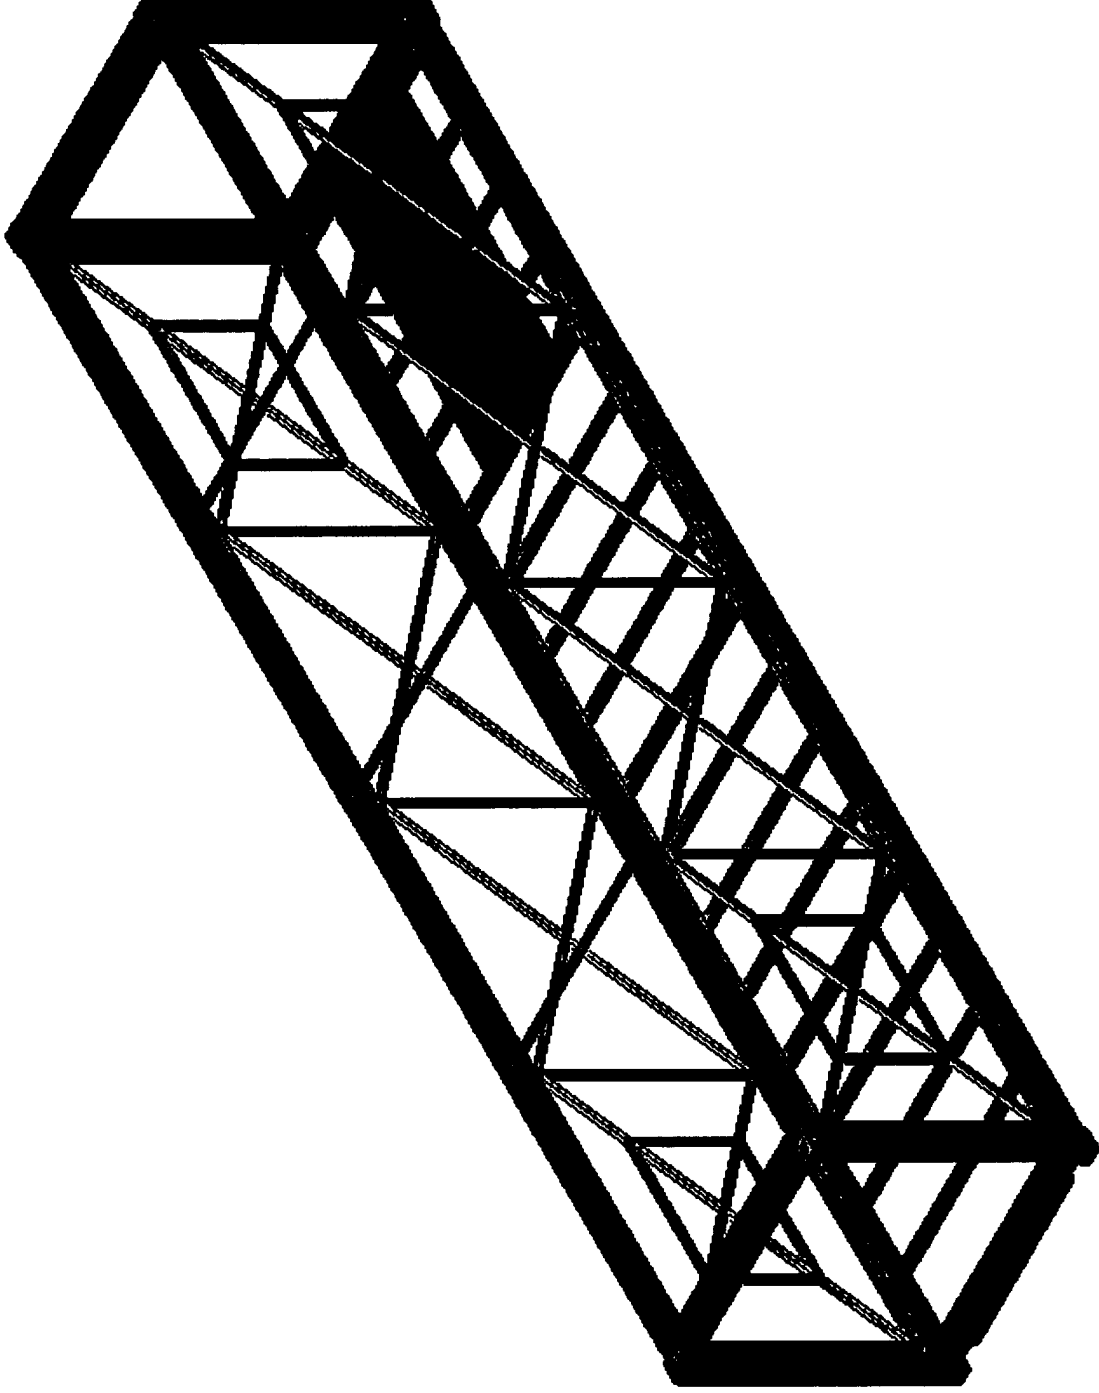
A: Opaque isometric view of the 40 foot collapsible cargo container frames
